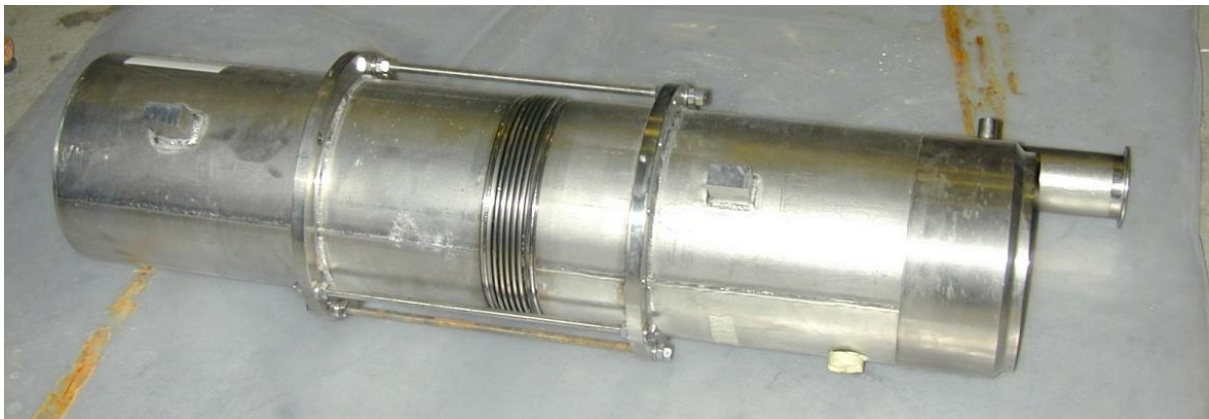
The modified He tank. The support screw rods, visible between welded rings, are temporarily placed to save the bellow from unwanted deformations.
